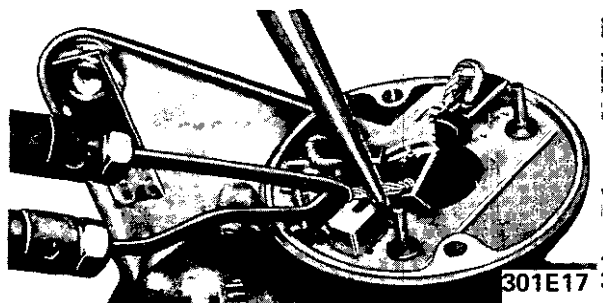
E-I 7 Solder Positive Brush Lead to Brush Holder
